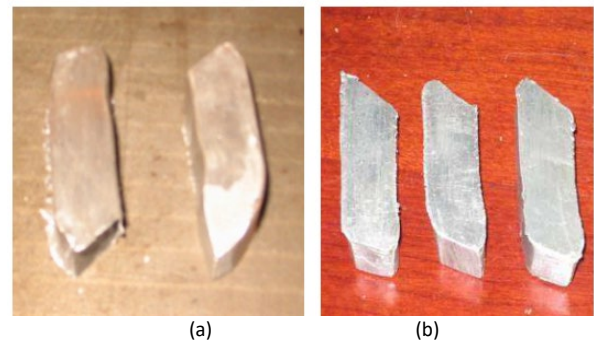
Aluminum billets after ECAP pressing: (a) Through 1 pass, (b) Through 2 passes
